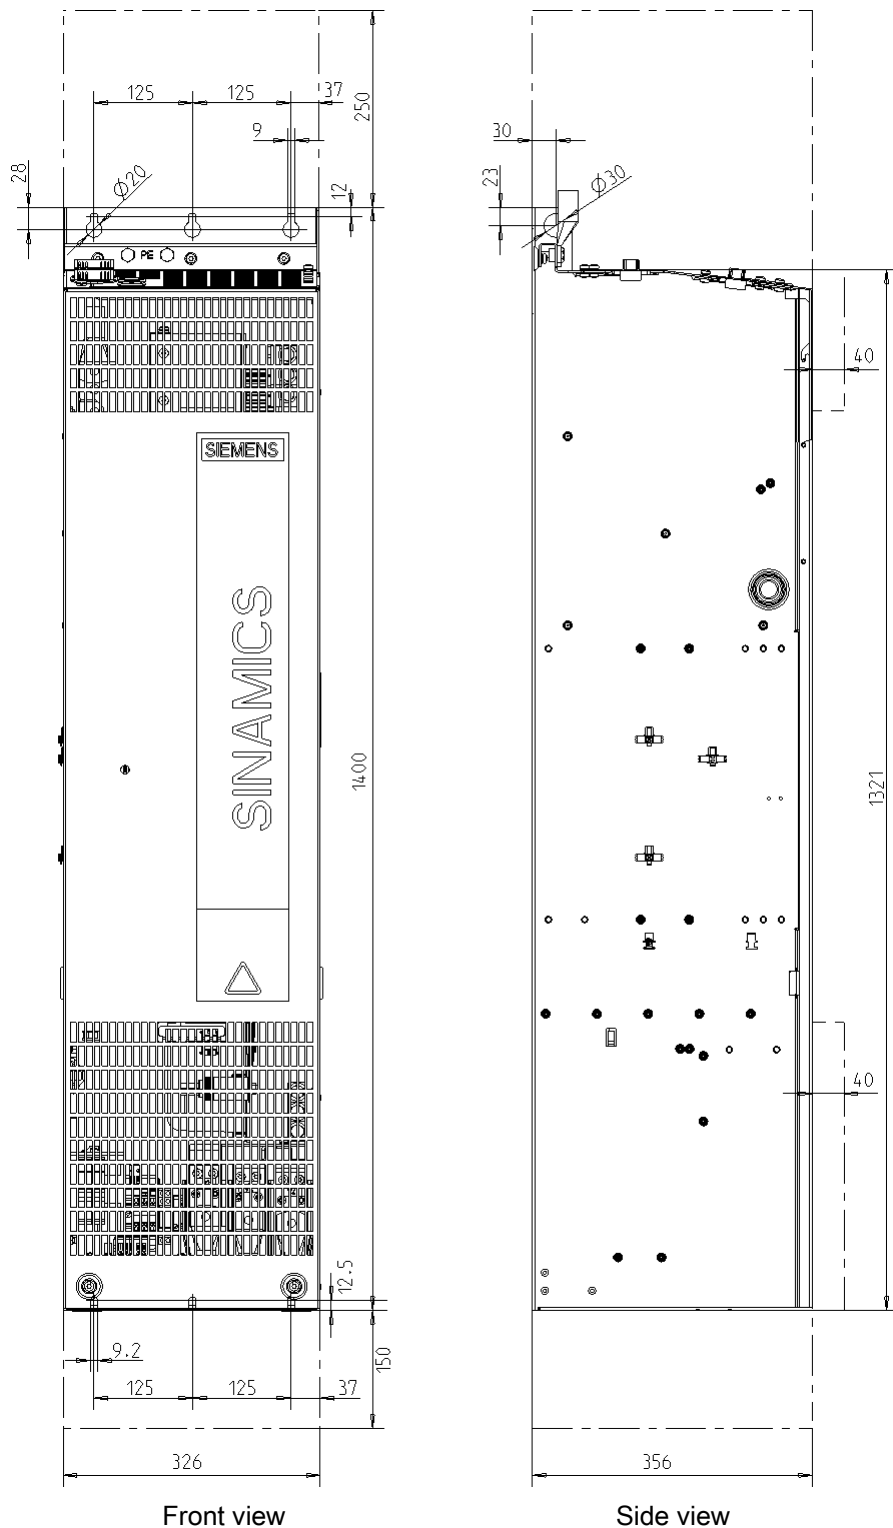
Dimension drawing of Active Line Module (type FX)
